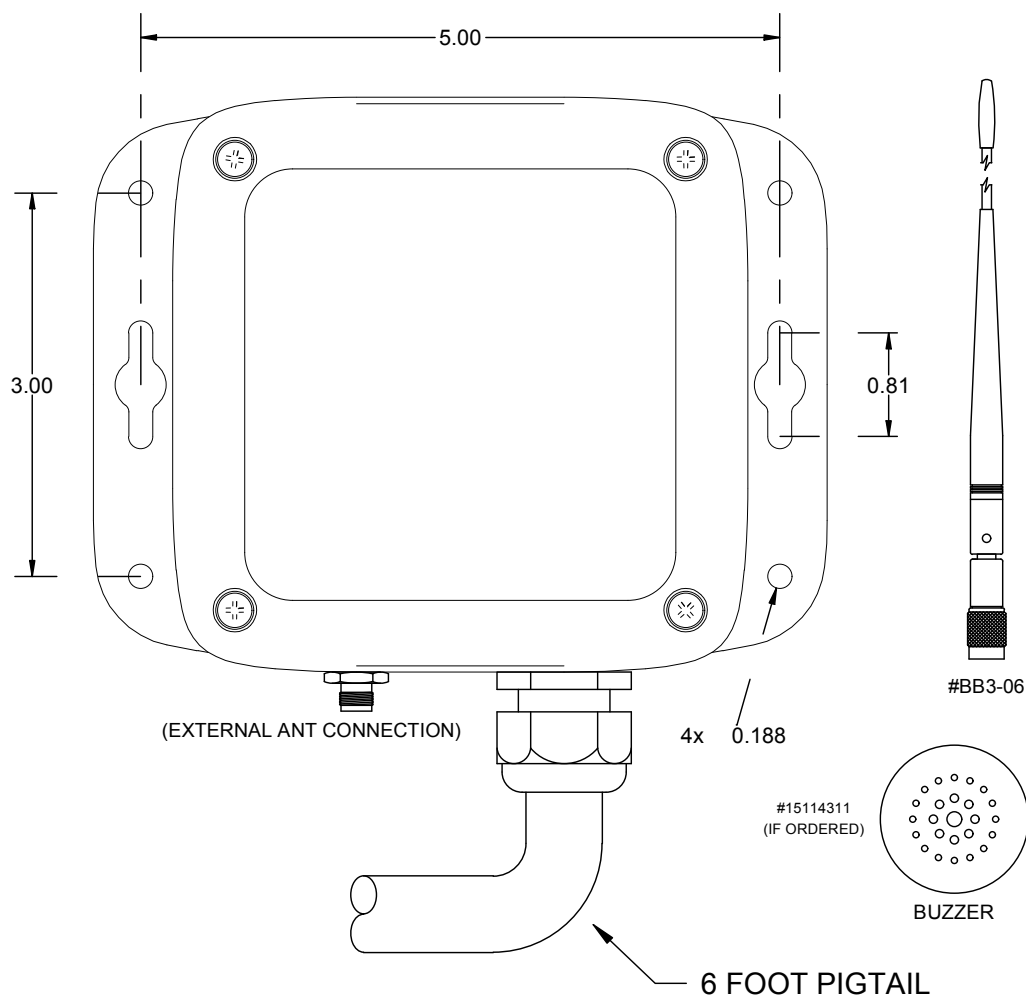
MU-9X9 Mounting Hole Locations and Accessories
